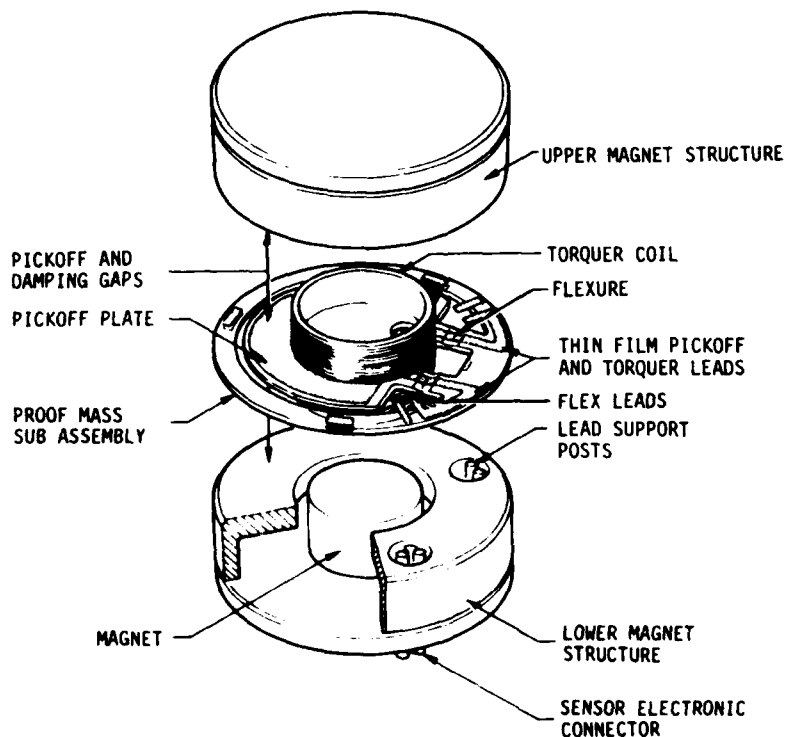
Q-FLEX Sensor Assembly, Exploded View.
